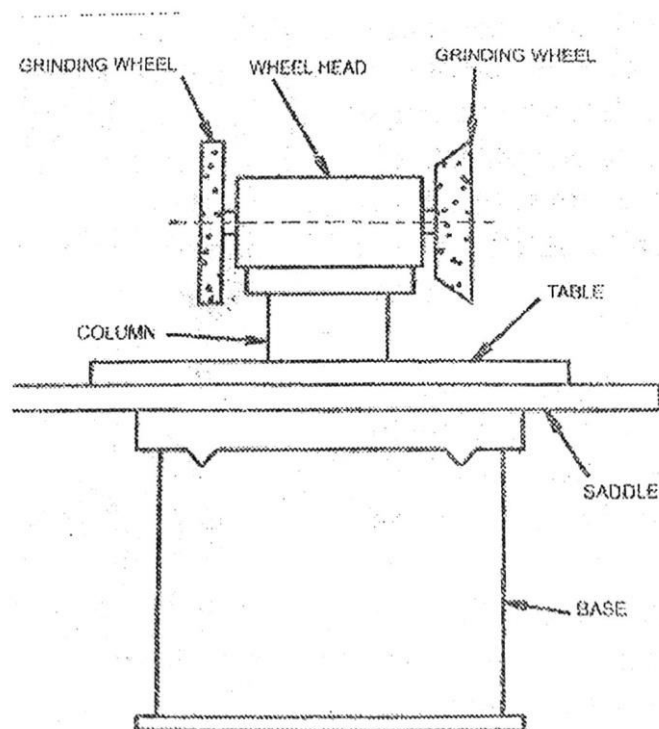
PRINCIPLE OF CYLINDRICAL GRINDINGFigure No.10. TOOL AND CUTTER GRINDER
